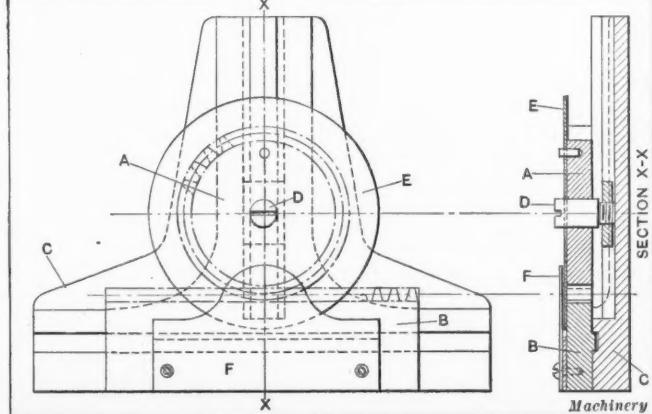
Device for Use in Mechanical Development of Pump Impeller Outlines
